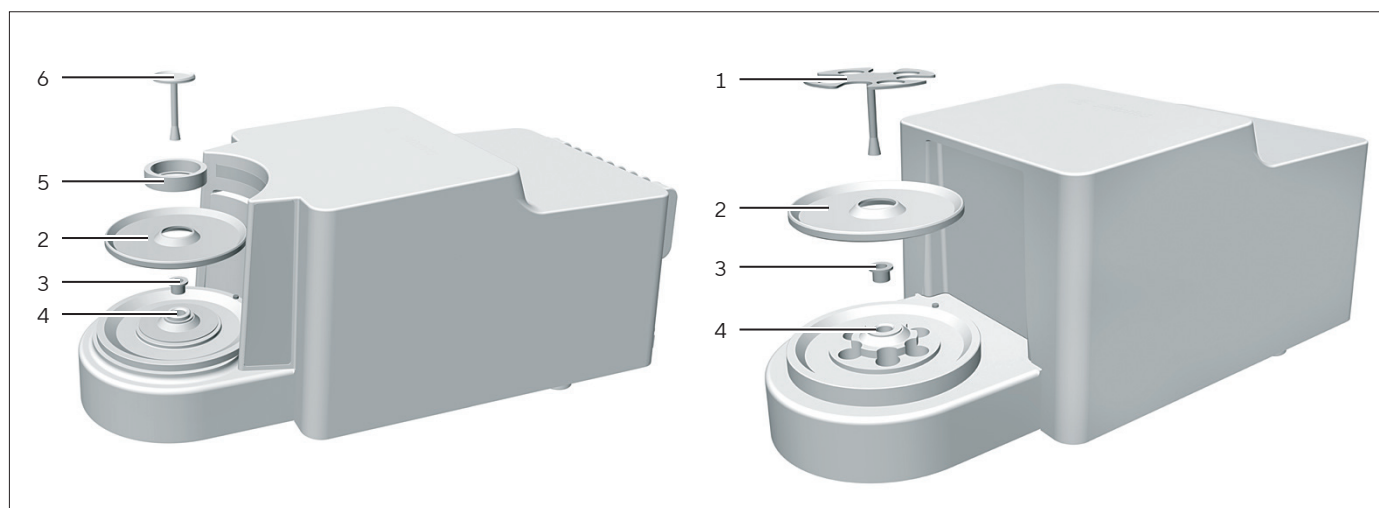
Microbalance with motorized glass draft shield and filter microbalance with manual metal ring draft shield (example)
